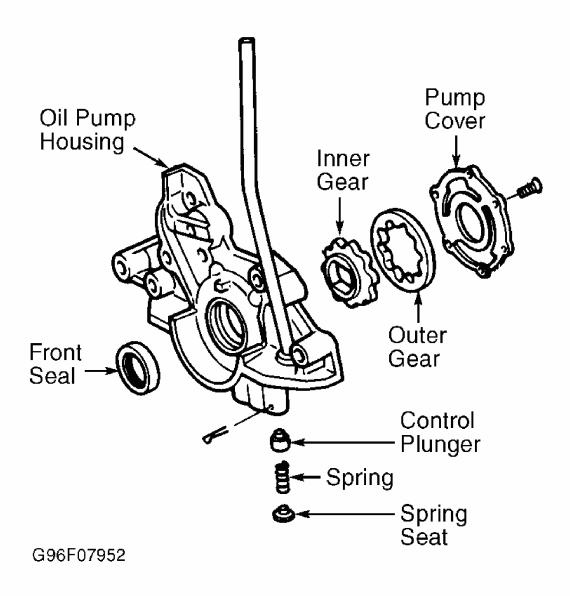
Exploded View Of Oil Pump Courtesy of MAZDA MOTORS CORP.
